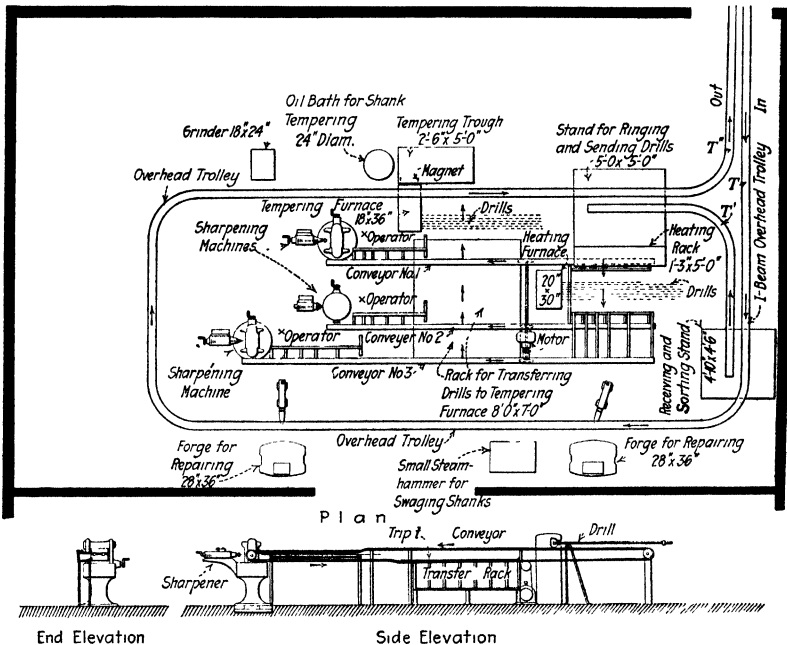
PROPOSED DRILL SHOP, CHAMPION MINE.
